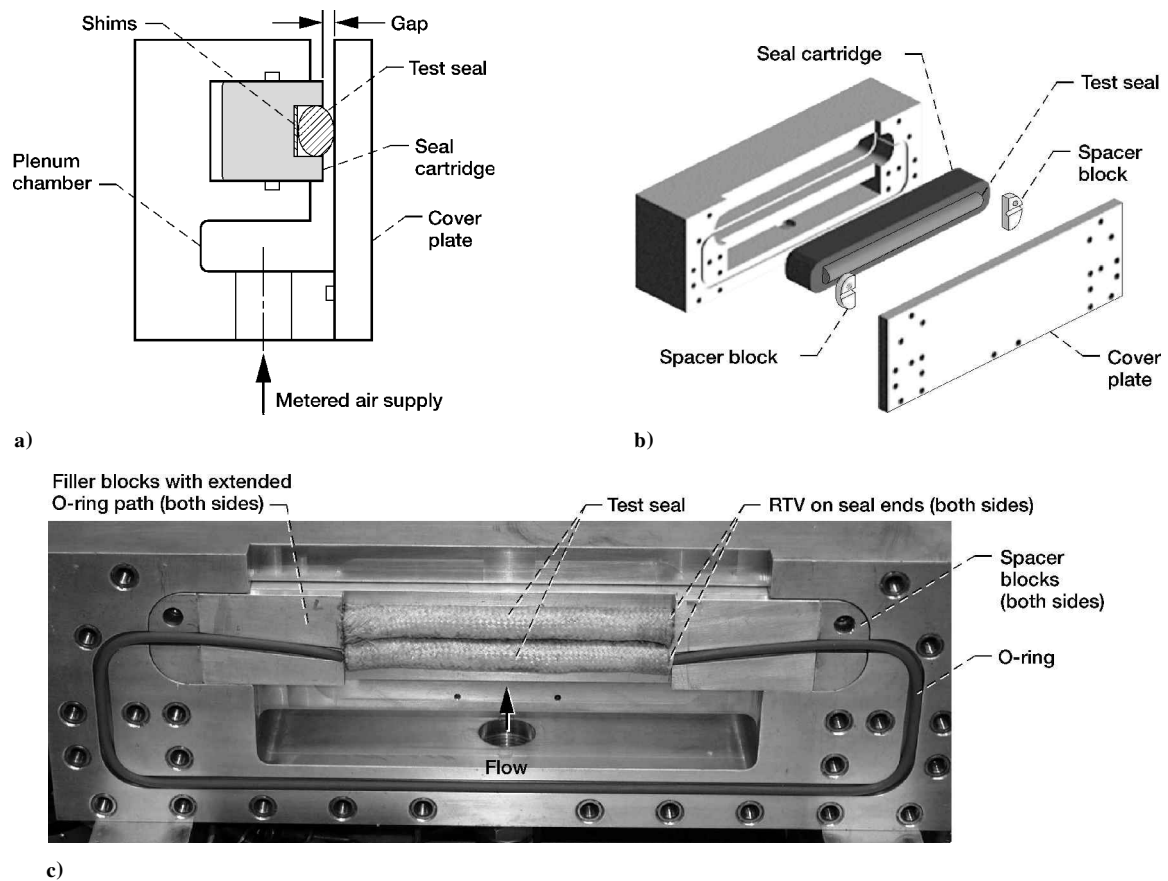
Schematic of flow fixture: a) cross section, b) isometric, and c) front view of 6.5-in. seal specimen installed in flow fixture showing grooved filler blocks that join O-ring to both ends of seal.
